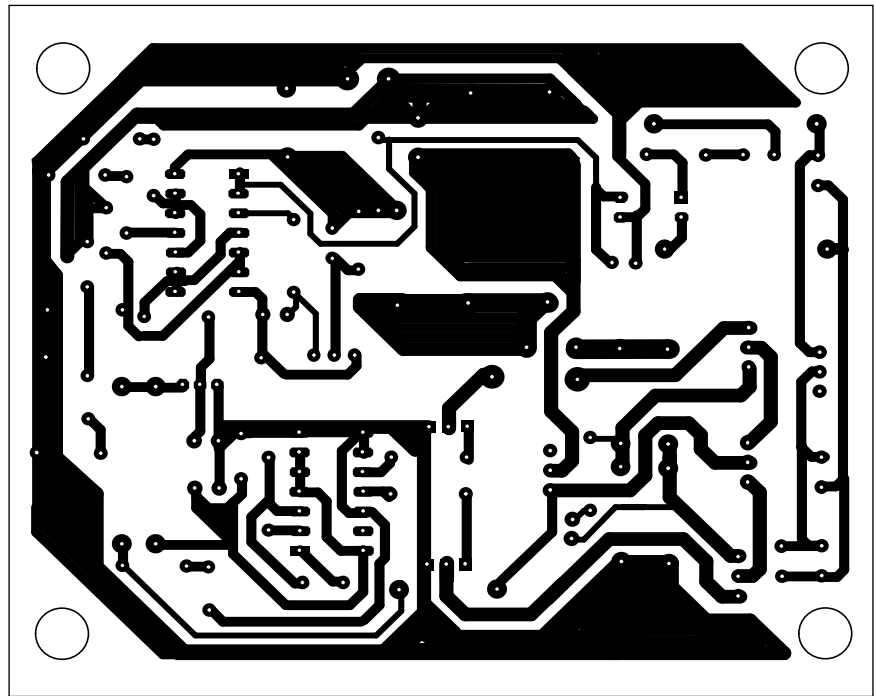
Actual-size, single-side PCB layout for the UPS for cordless phones
